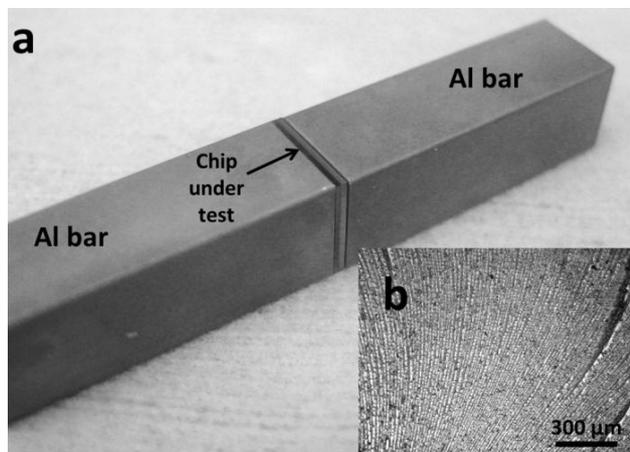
Bonded samples for pull-testing. (a) Assembly of sample with aluminium pulling bars. (b) Optical microscope image of fractured interface after pull-testing. In general, fracture occurs in the form of cracks within the parylene-C layer.
